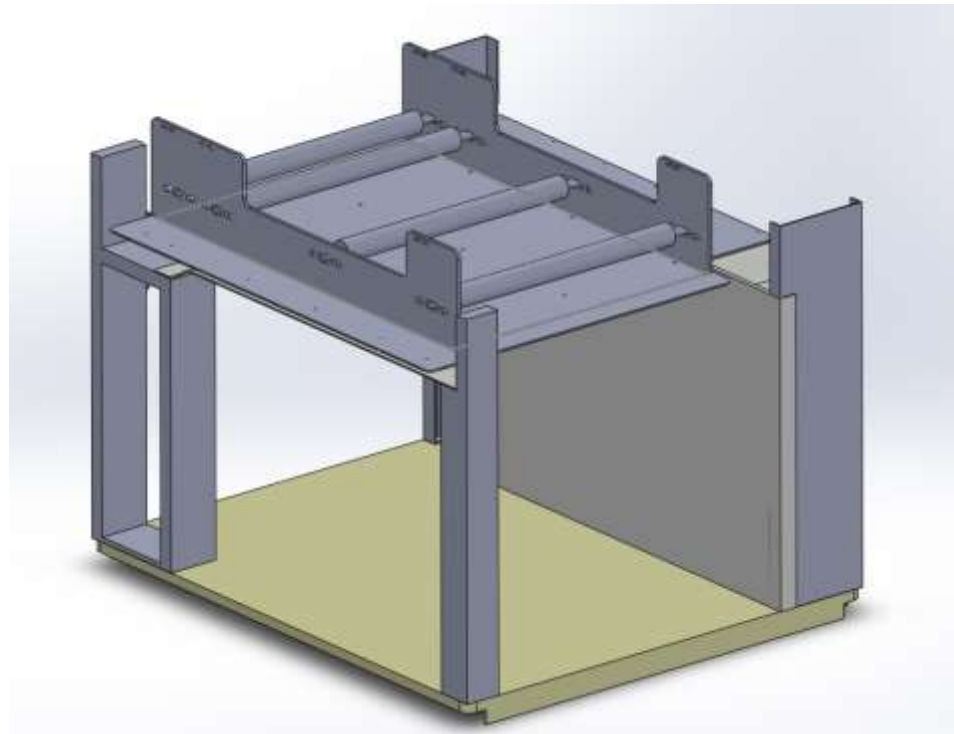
Design of the conveyor shaft support and the serrated cutting unit
